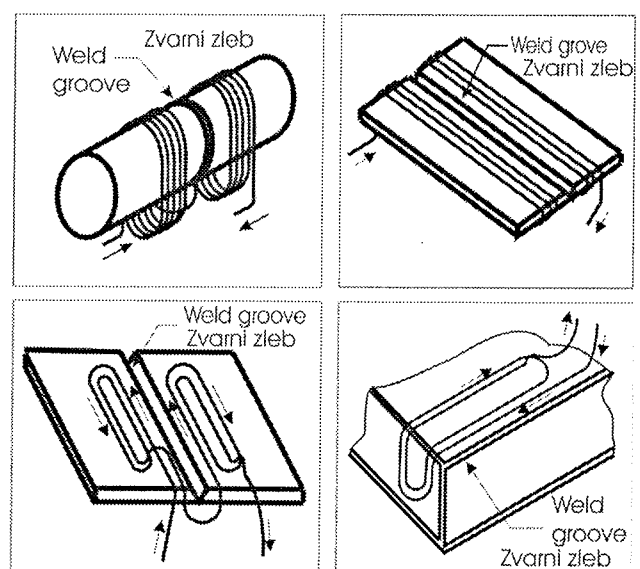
Some alternative variants of electric cable arrangement to demagnetise weld groove, i.e. welded joint.
